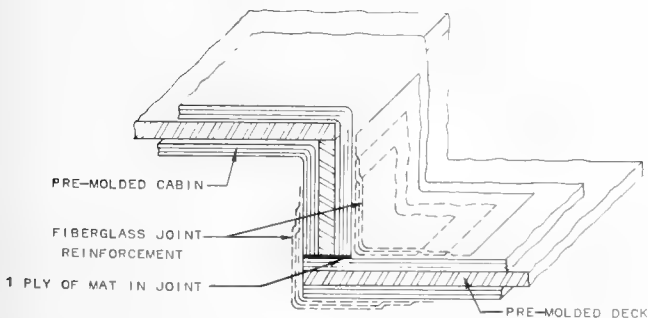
Cabin to Deck Connection - Pre-molded Cabin and Deck - Sandwich Construction
